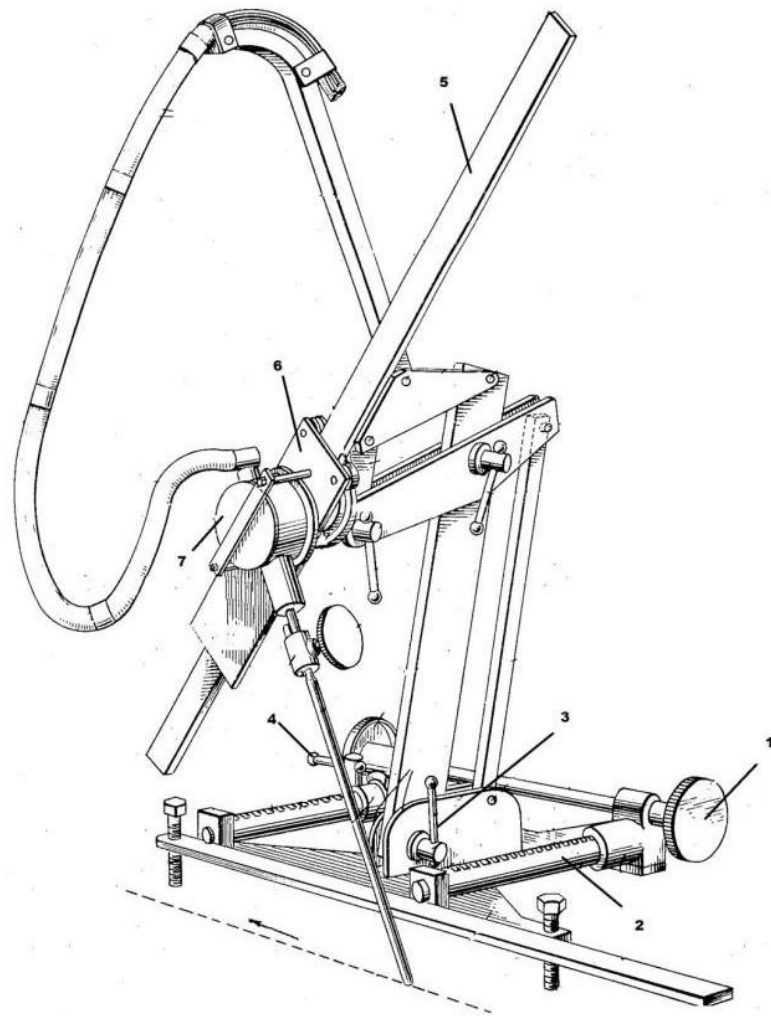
design Appearance of the unit for gravity welding of straight welds
